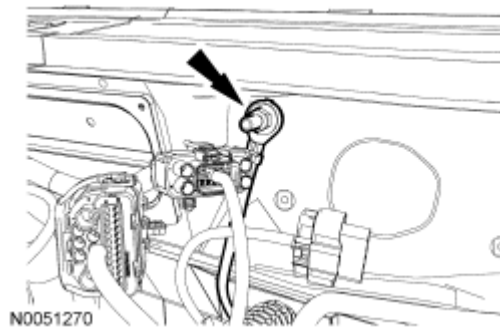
Removing Nut & Positioning Ground Cable Aside
